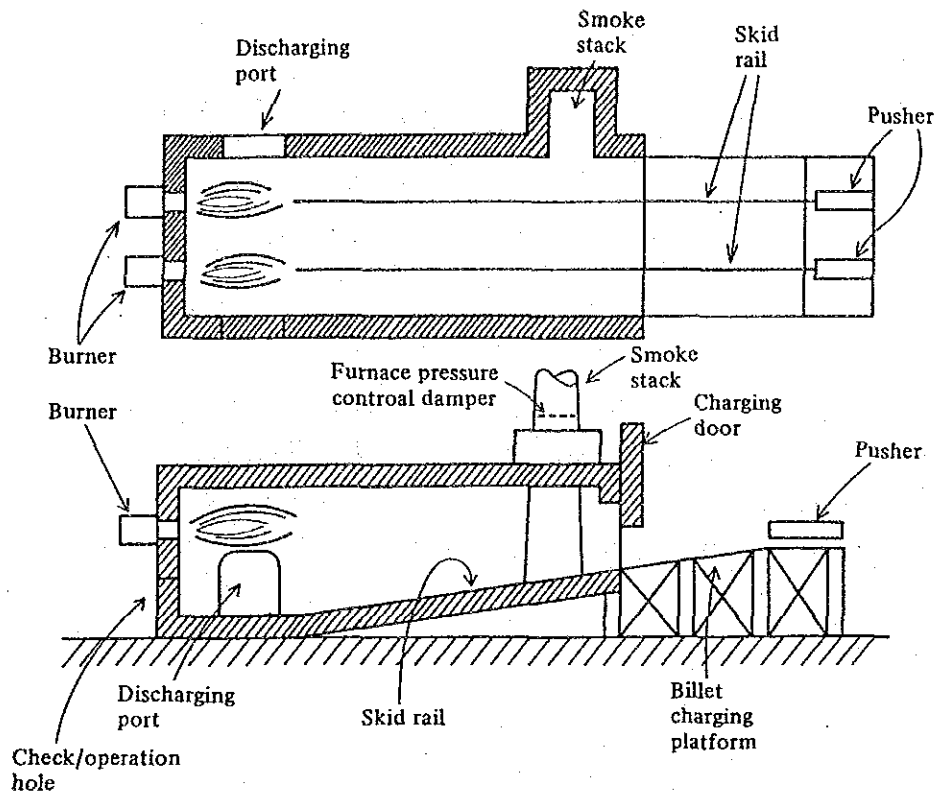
Pusher-Type Single Zone Reheating Furnace
